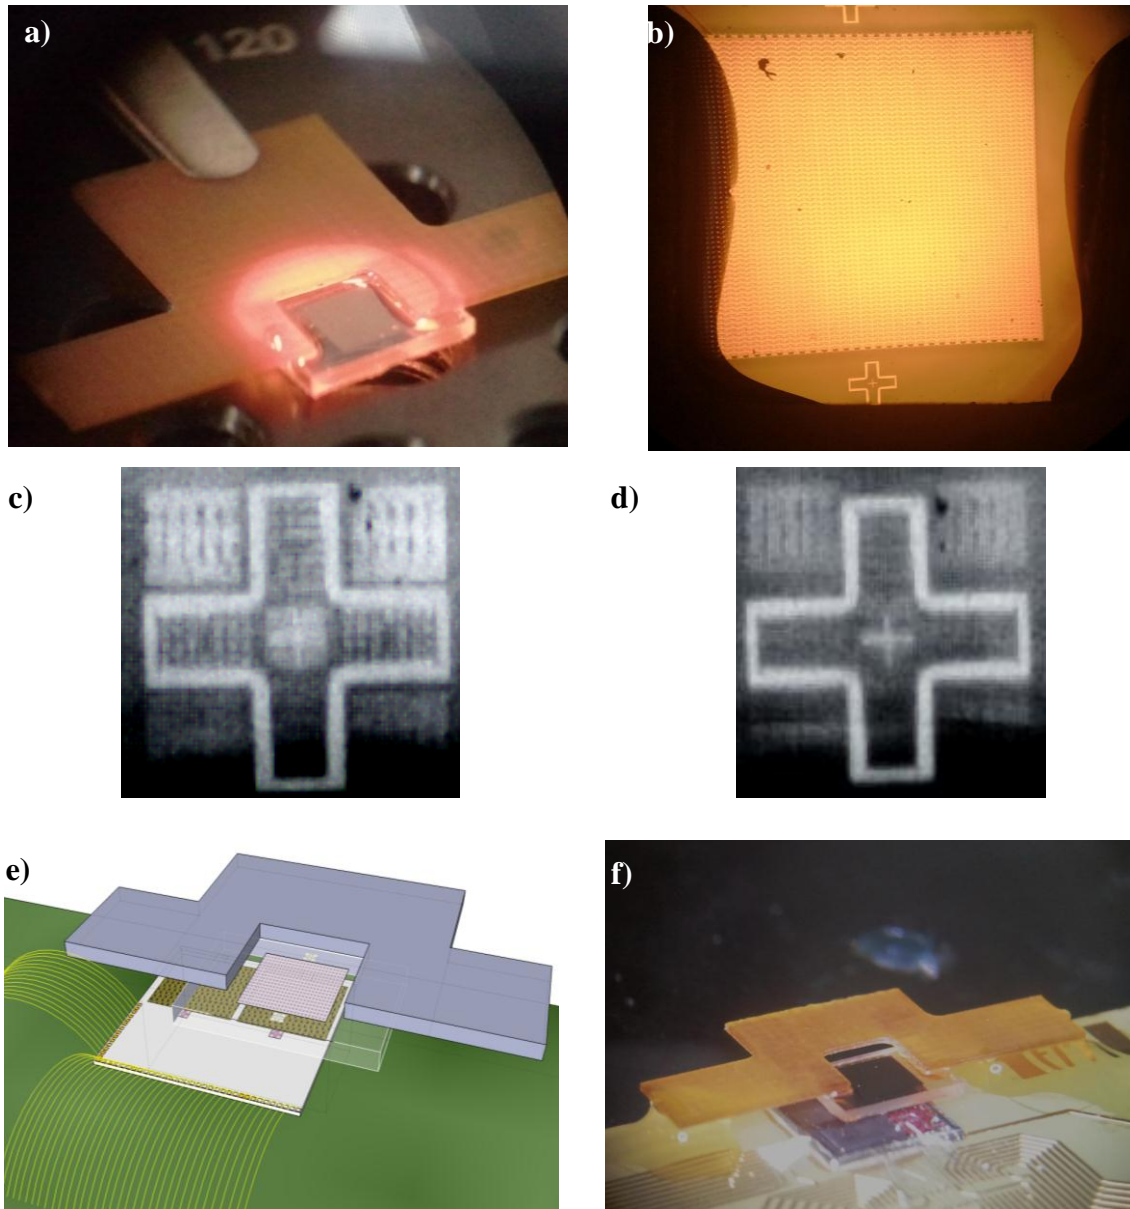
(a) MEMS chip with holder PCB. (b) Microscope image of MEMS array with epoxy. (c) Inspected alignment marks after UV cure of epoxy. (d) Alignment mark that is not inspected during alignment. (e) Google SketchUp model of the integration. (f) Image of MEMS chip integrated with CMOS chip.
